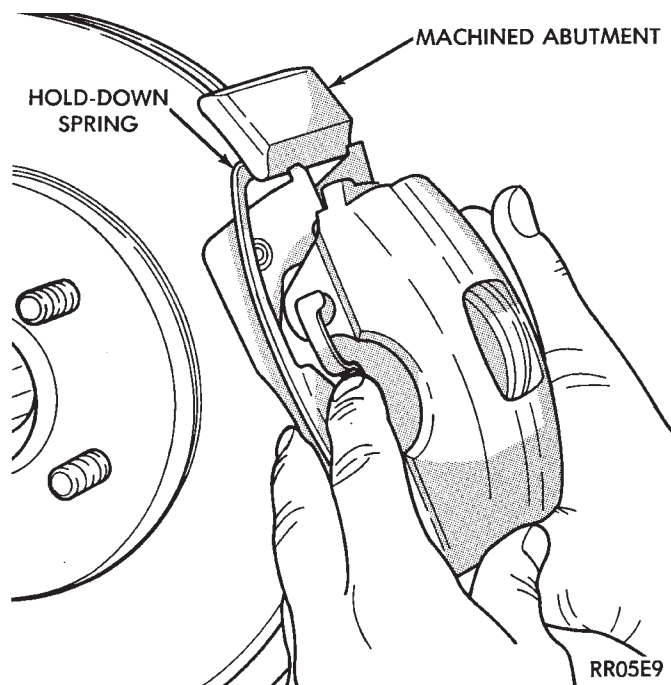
Removing Caliper and Brake Shoes as an Assembly
